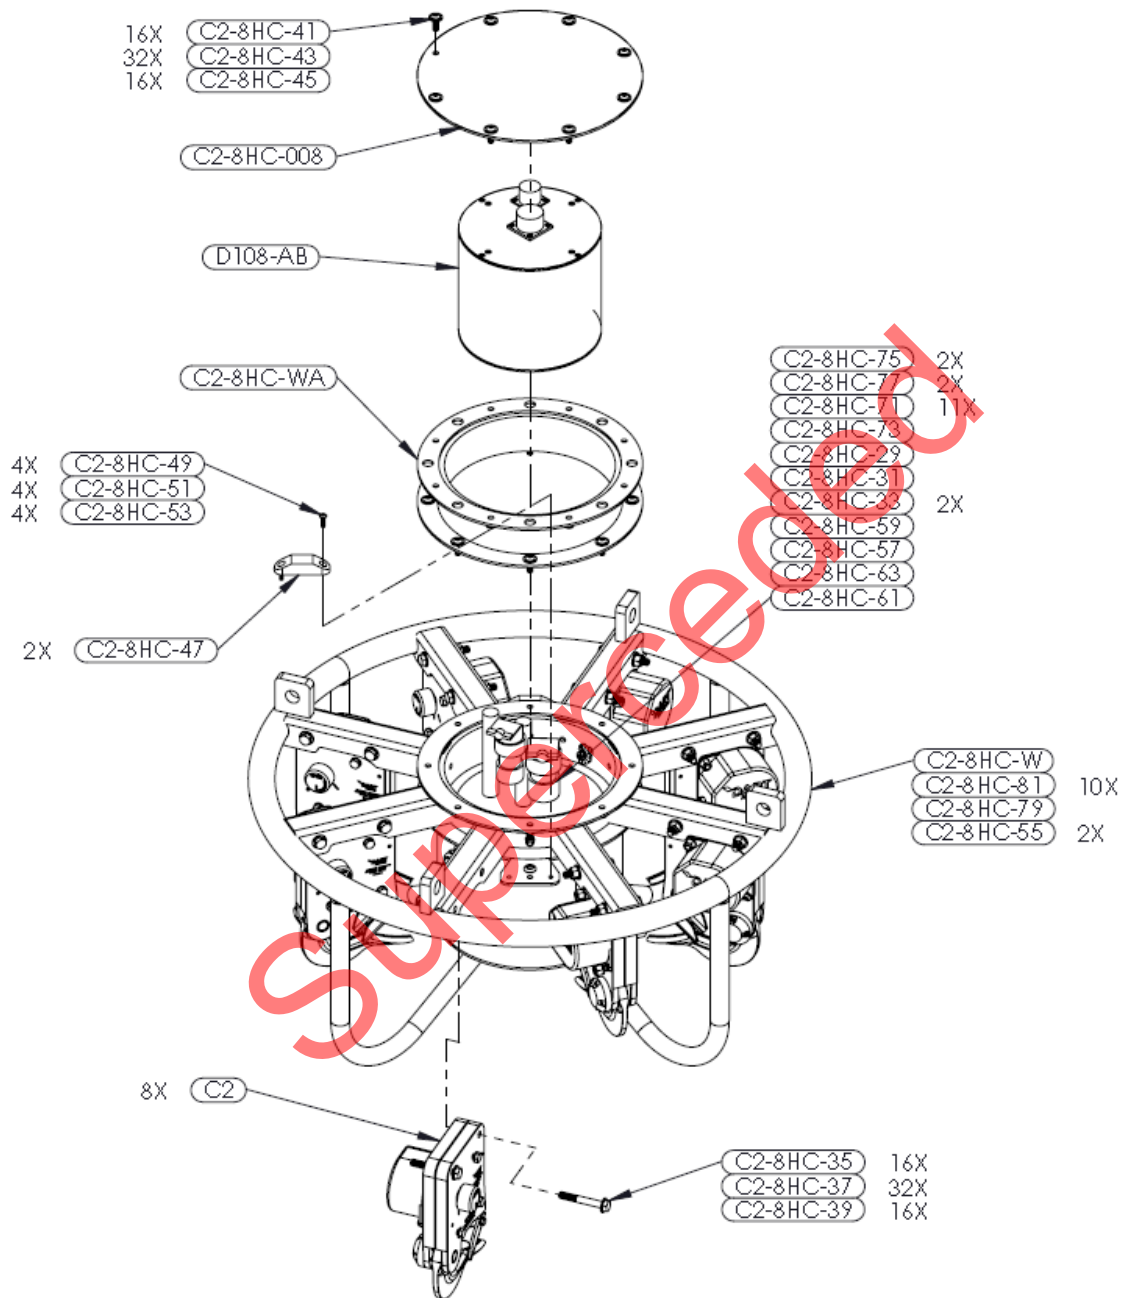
Exploded view of 8 Hook Carousel (C2-8HC). Check Table 1 (section 10.1) for the assembly differences between the 8 Hook and the 6 Hook and the 4 Hook Carousels.
